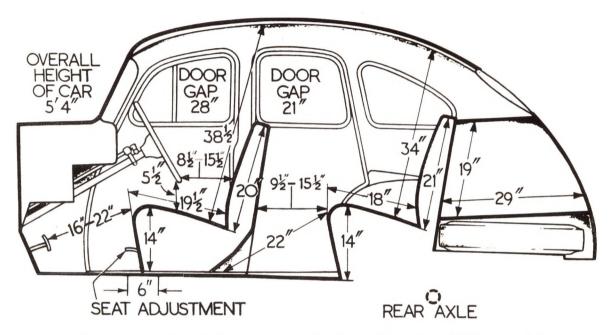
Internal body dimensions in elevation. (By courtesy of "The Autocar".)
